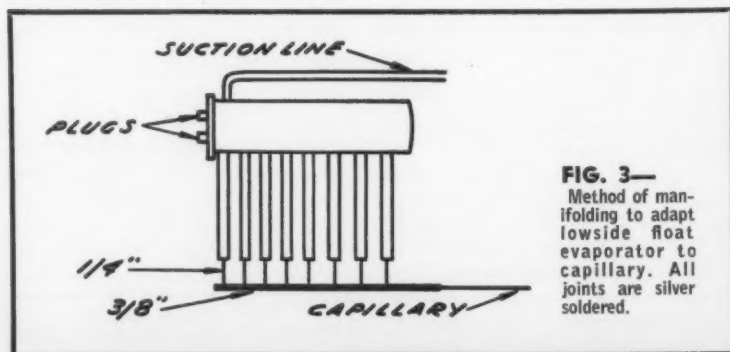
Method of manifolding to adapt lowside float evaporator to capillary. All joints are silver soldered.
